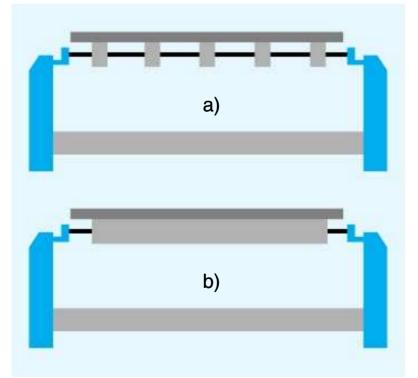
Idlers a) wheels on a common shaft Idlers b) tubular roller
